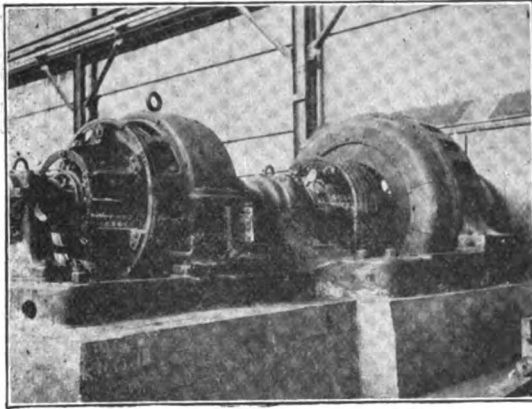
(above) shows a Westinghouse motor. As in the case of the motor driving the universal mill, this motor was also designed especially to meet the requirements of this particular installation.
